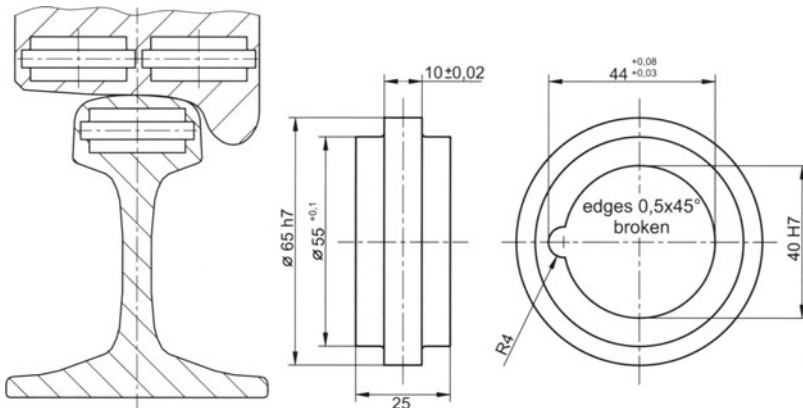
Points from where test rollers were taken (left) and dimensions of test rollers (right)
